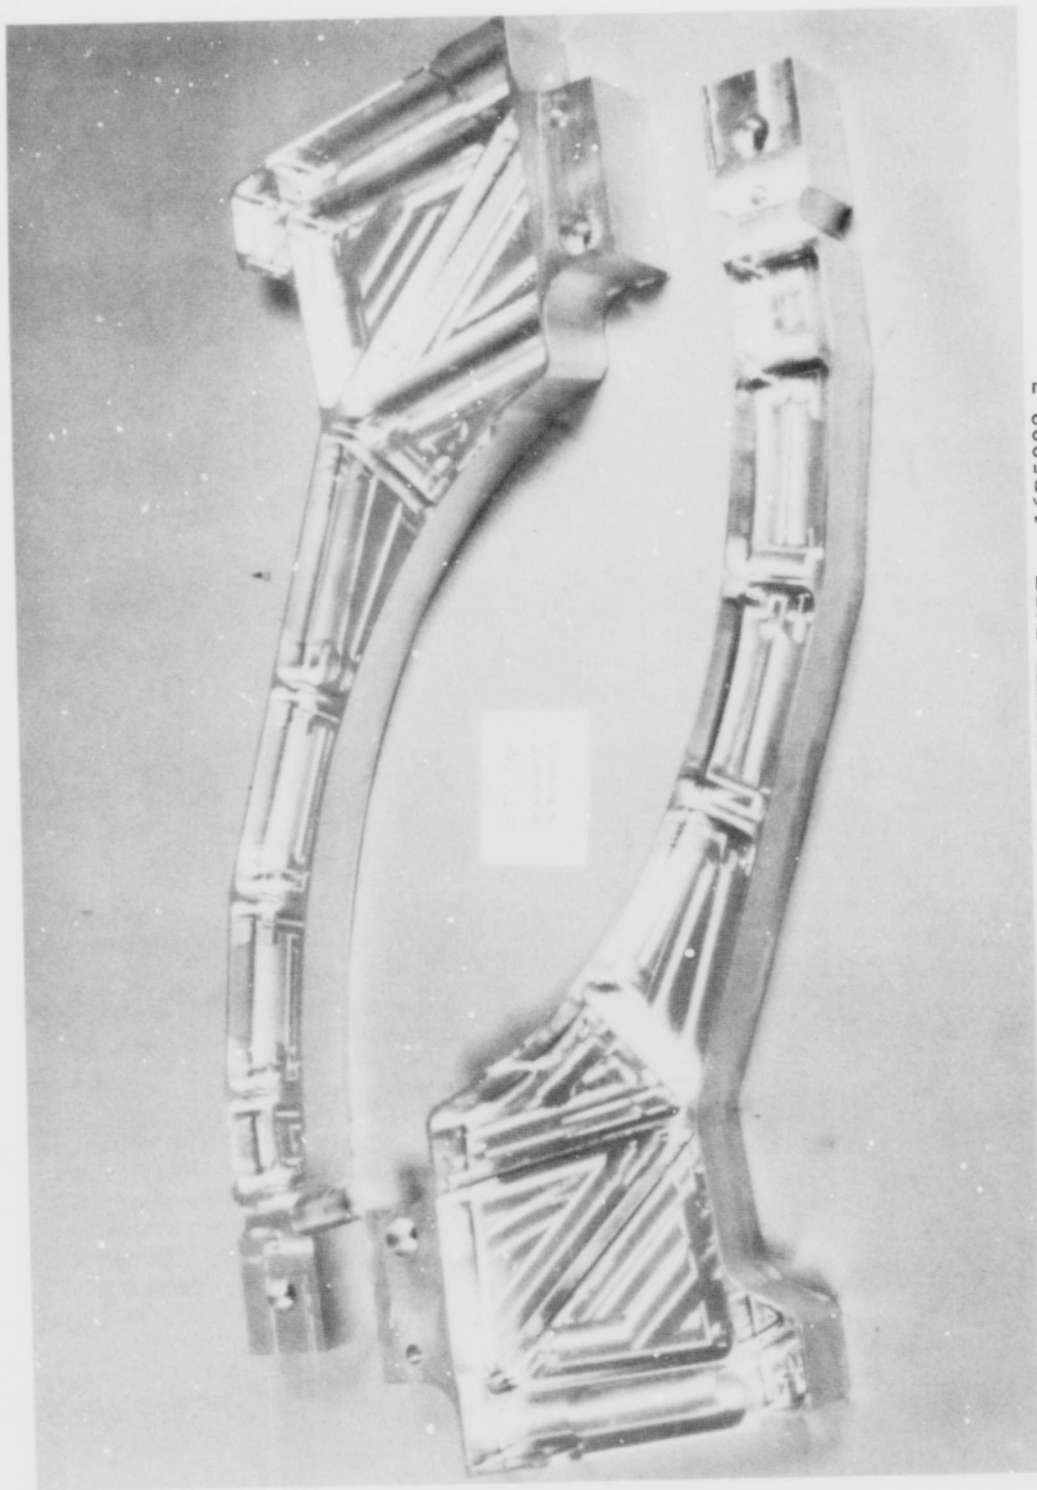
RTC/NC MACHINED PART - 16B5222-7
